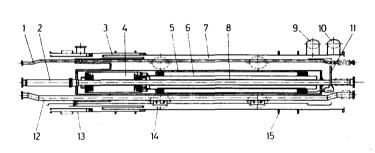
Longitudinal cut of quadrupole cryostat 1 shield cooling tube; 2 beam monitor; 3 vacuum barrier; 4 correction dipole; 5 helium container with cold support tube inside; 6 quadrupole; 7 insulating vacuum; 8 beam tube; 9 two phase safety tube; 10 one phase safety tube; 11 current leads for correction dipole; 12 helium tube; 13 sleeve for connecting magnets; 14 internal supports; 15 reinforcing rings
